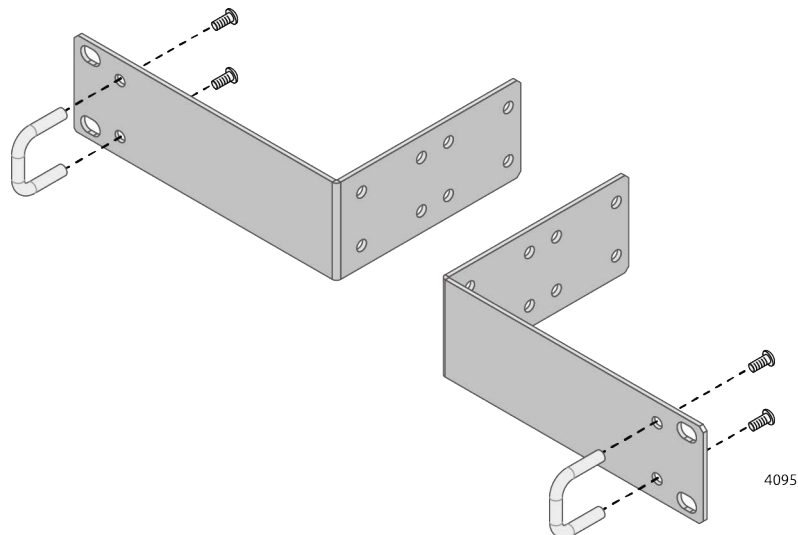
Attaching the Handles to the RKMT-J14 Brackets
